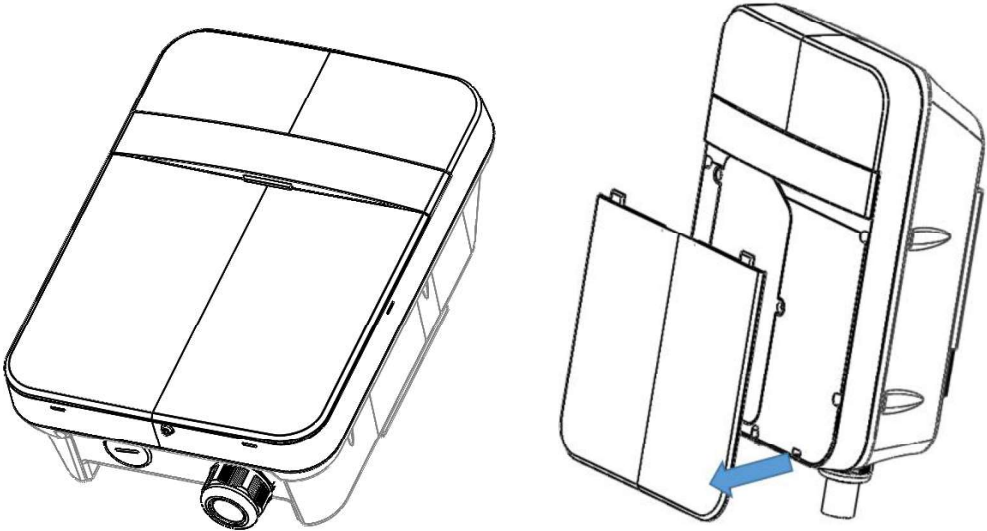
Use flat tip screw driver to push snap then open front cover.
